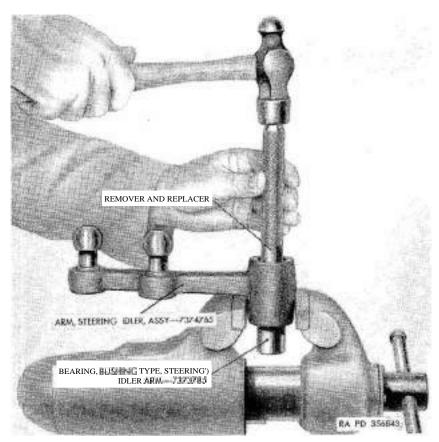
Removing steering idler arm bushing-type bearing with a bushing re-mover and replacer.
